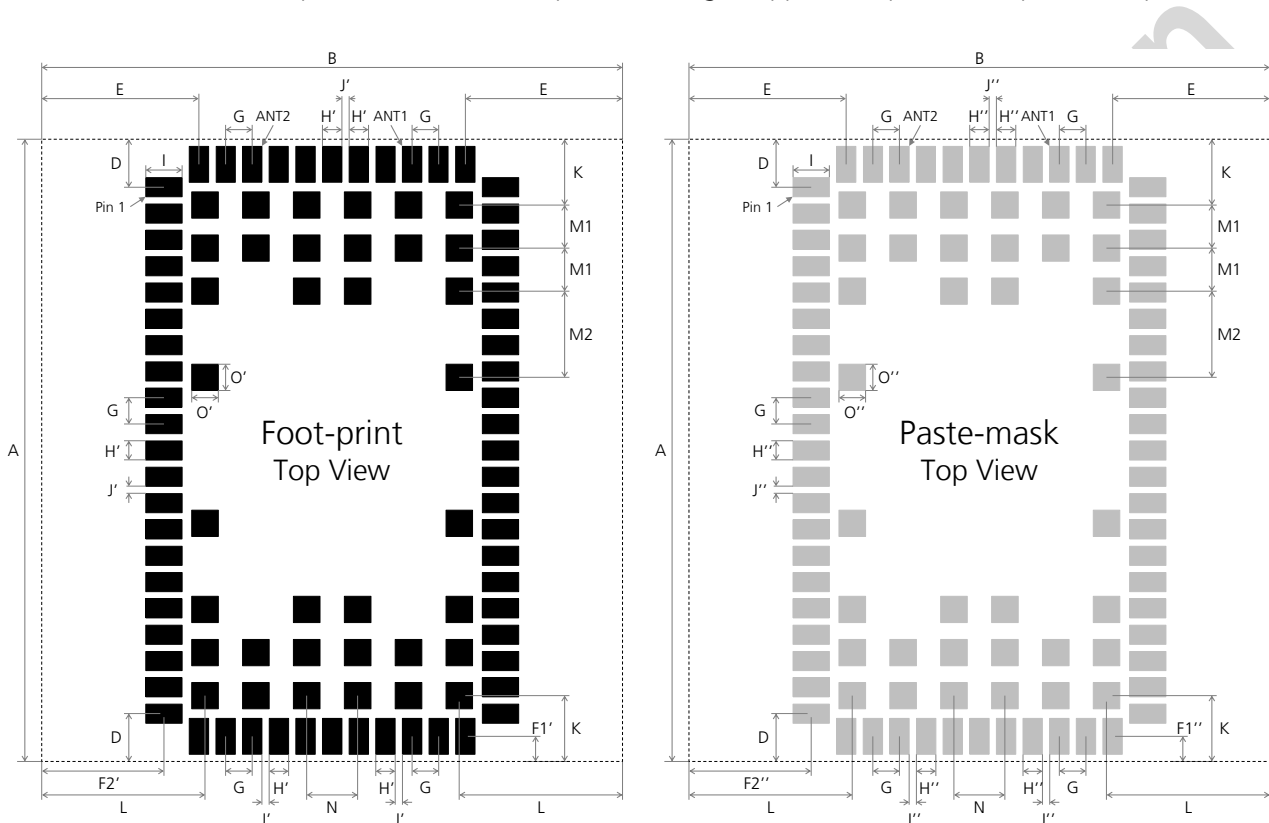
LARA-R2 series modules suggested footprint and paste mask (application board top view)
